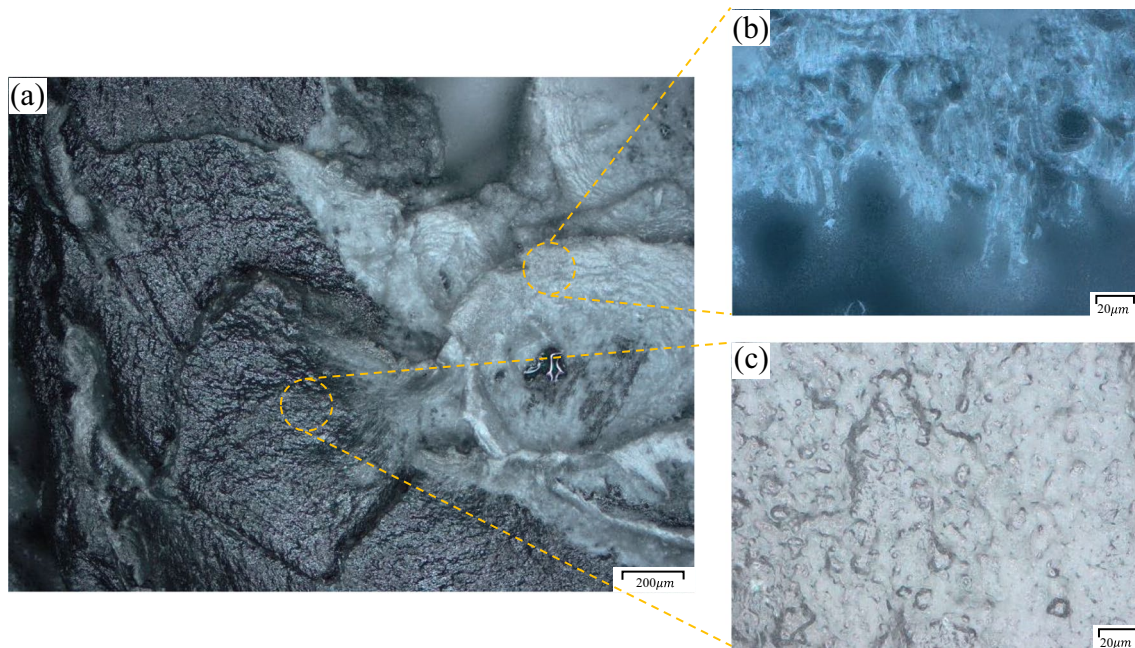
The fracture surface of a sample with a layer height of 0.1 mm a brittle and ductile fractures in the black and white zones, b fibrils formed due to crazing, and c magnified surface of the brittle fracture
